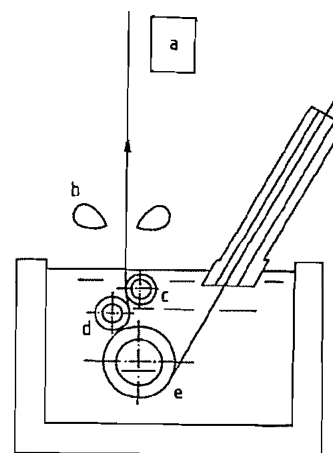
Control of coating thickness: a) Coating thickness measurement; b) Jet processing nozzle (slit); c) Pass line roll; d) Stabilizing roll; e) Bottom roll.
